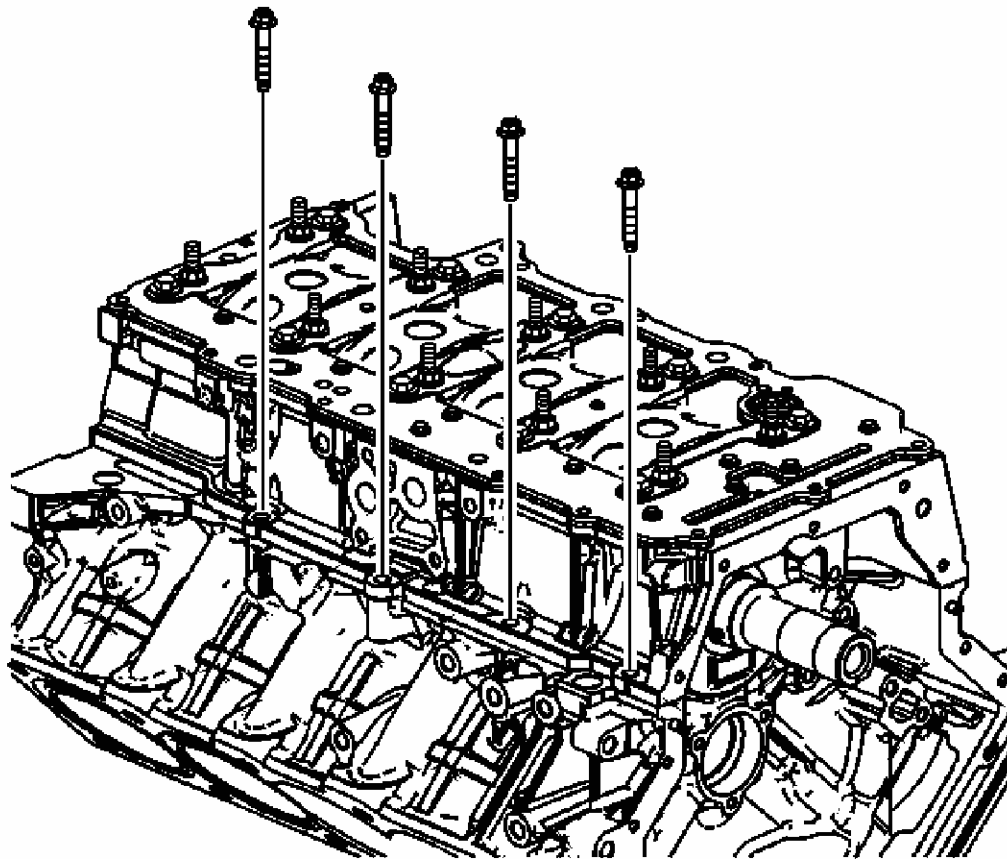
Identifying Lower Crankcase Perimeter Bolts - Left Side
